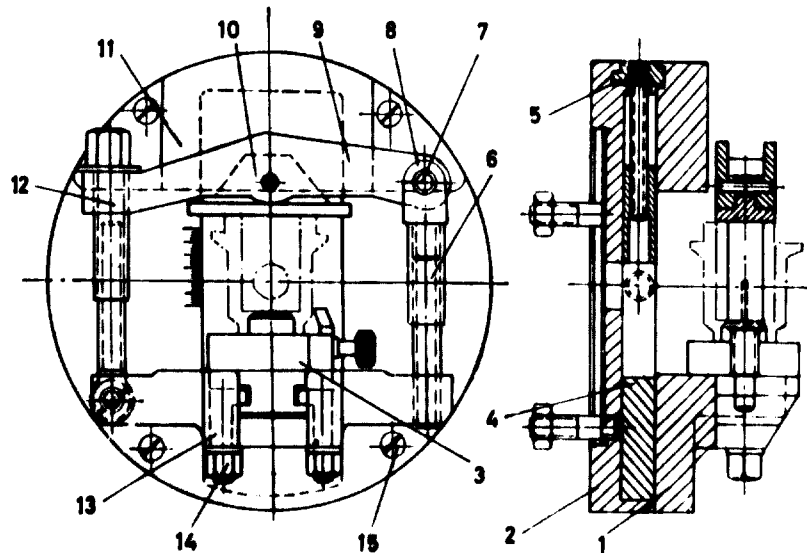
Group-adaptable fixture for fastening to the faceplate of a turret lathe
